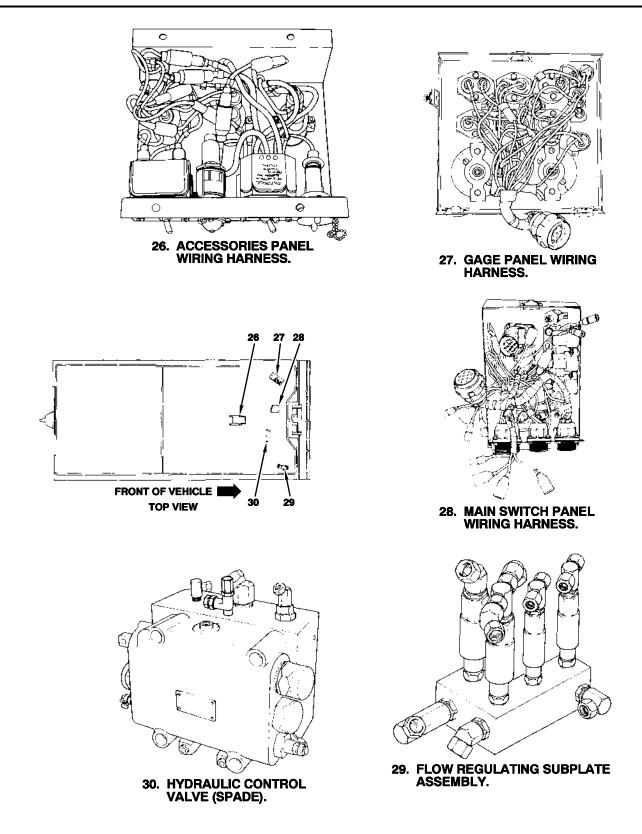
Location of Major Components, Assemblies, and Auxiliaries (Sheet 6 of 8).
